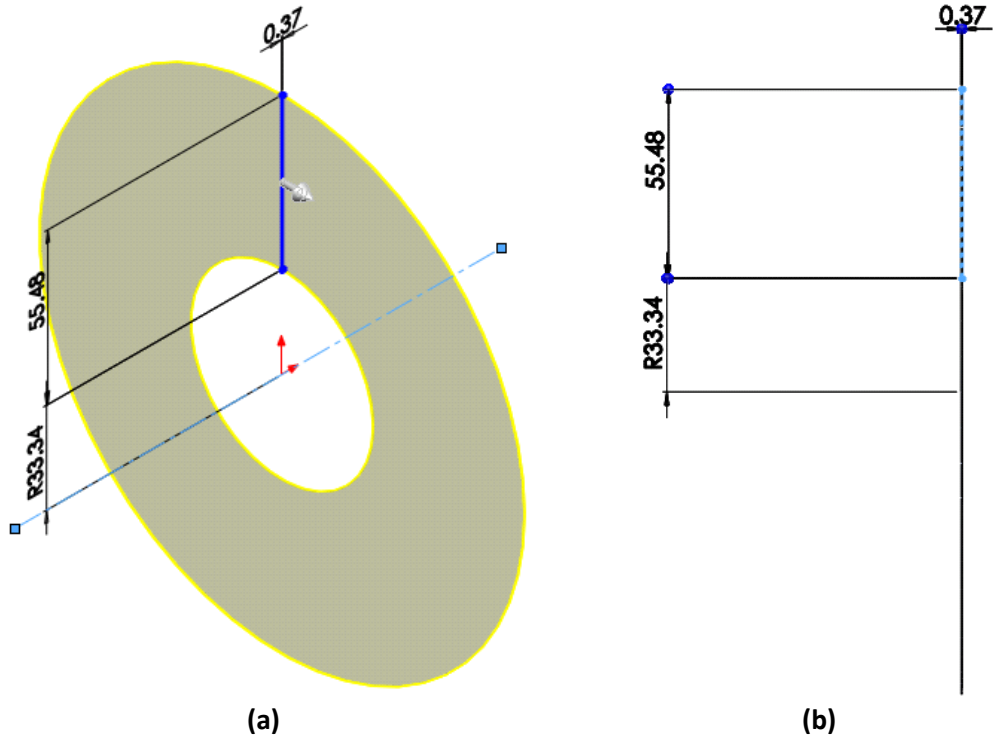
Geometry preparation of the axial clearances showing (a) isometric view and (b) cross-sectional view of the axial clearance disk.
